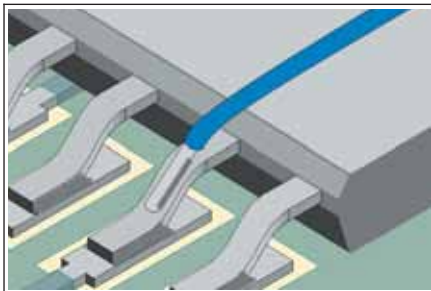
Not Recommended Wire soldered to component lead, wire over component.
